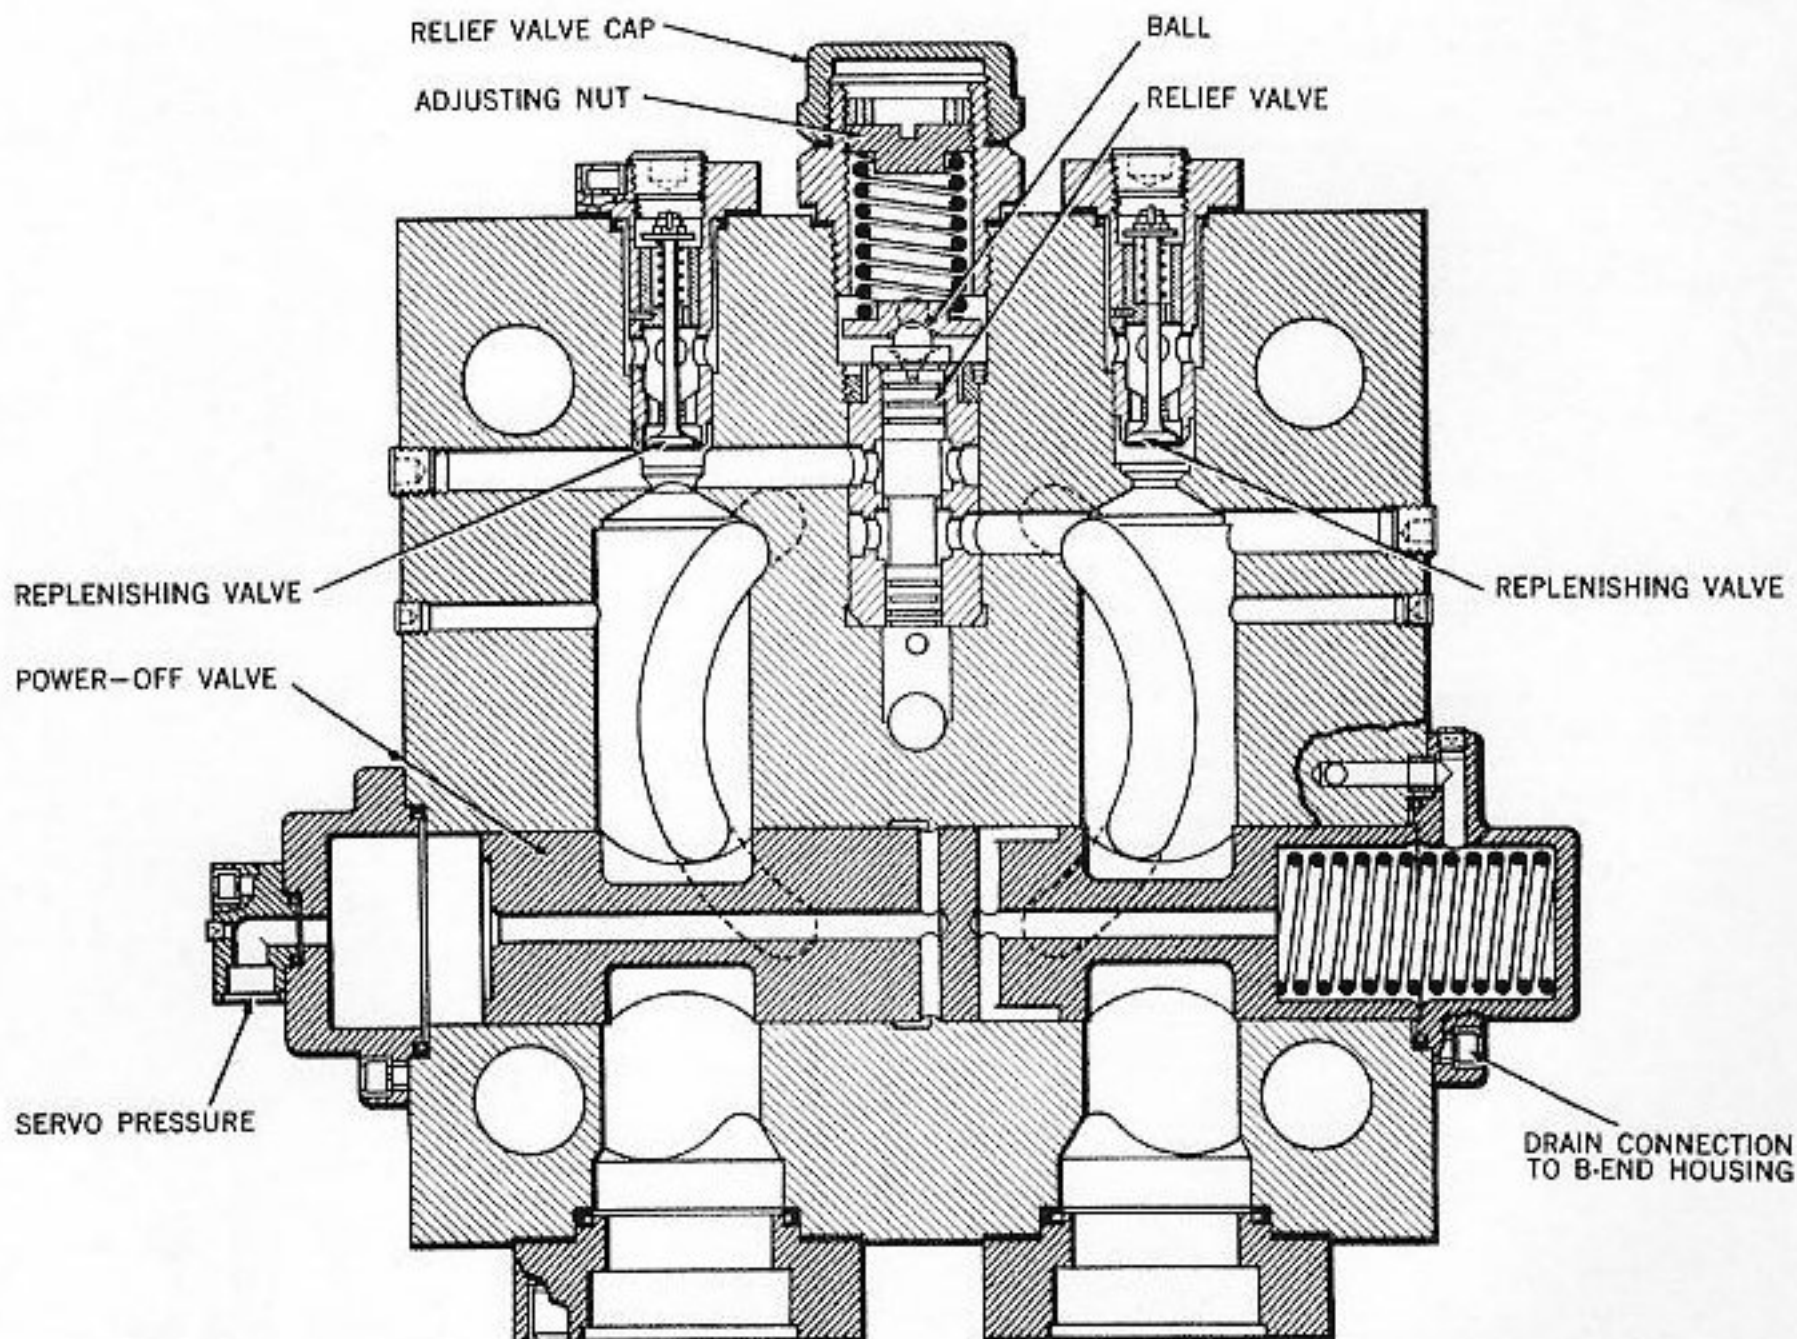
Elevating Gear B-end Relief Valve Adjustment, Sectional View
